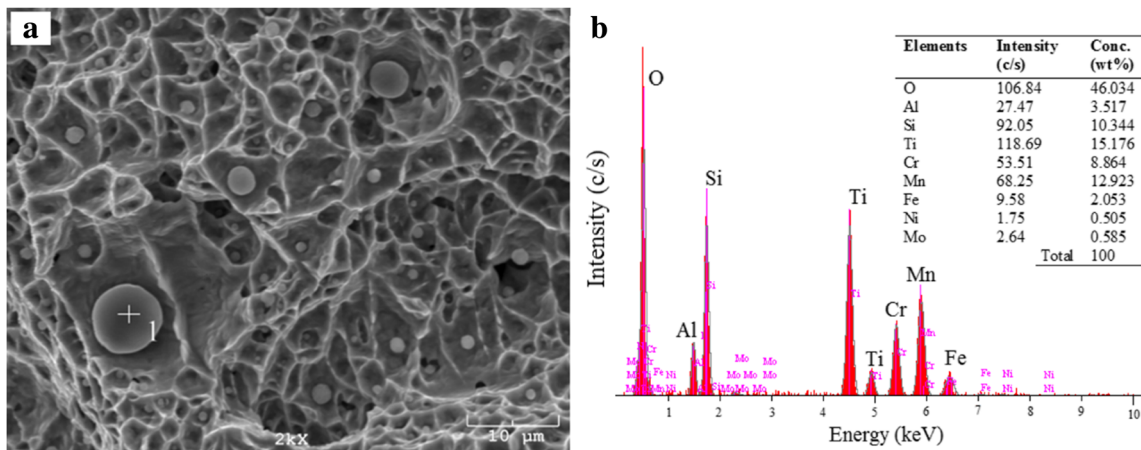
Fracture surface of Charpy impact sample welded under pure CO₂ and EDS analysis results of inclusion
